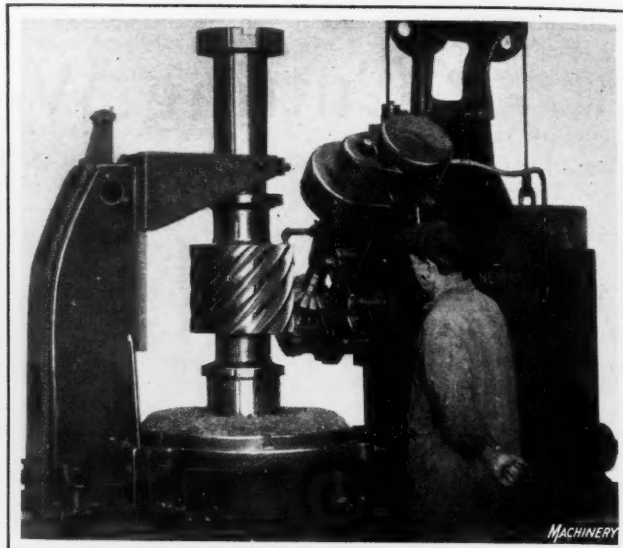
Milling Twelve-threaded Worm on Hobbing Machine using a Disk Cutter and Hand-indexing
